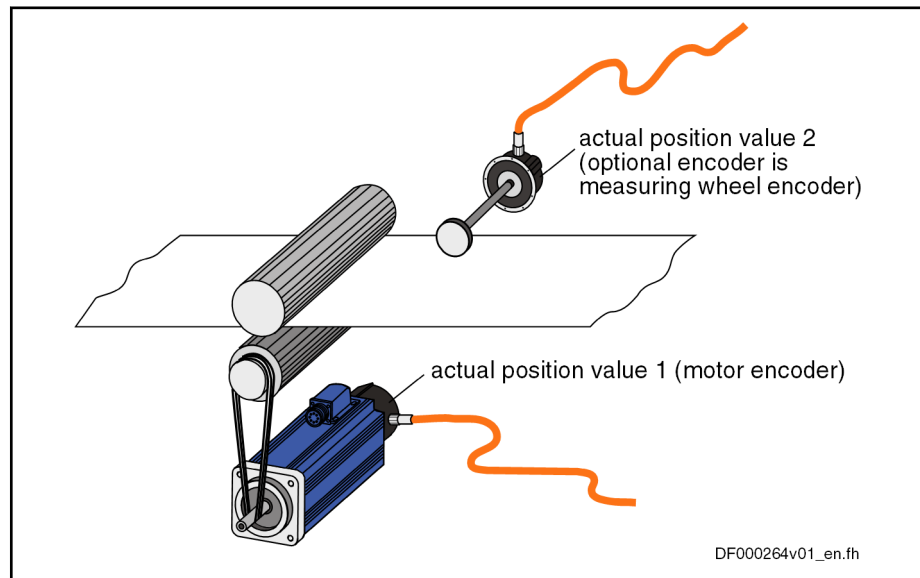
Typical Arrangement of a Drive for Material Infeed with Measuring Wheel Encoder
